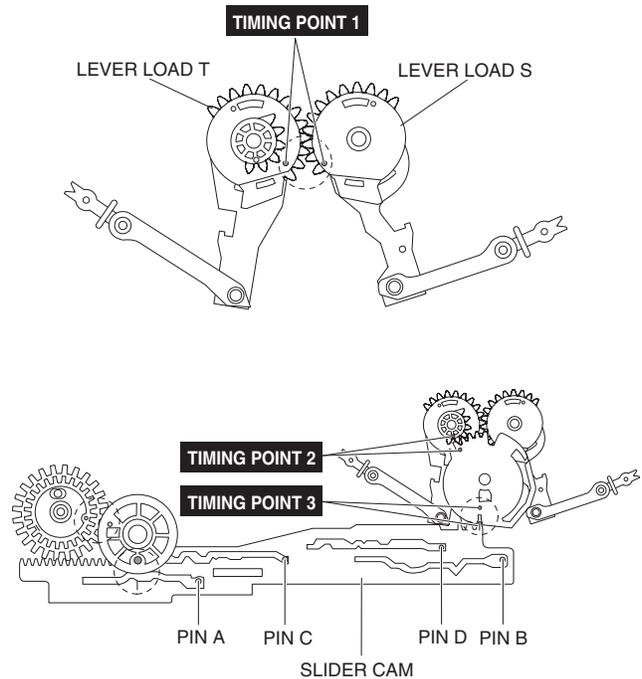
Gear Loading Drive, Slider Cam, Lever Load S, T Ass'y Assembly
